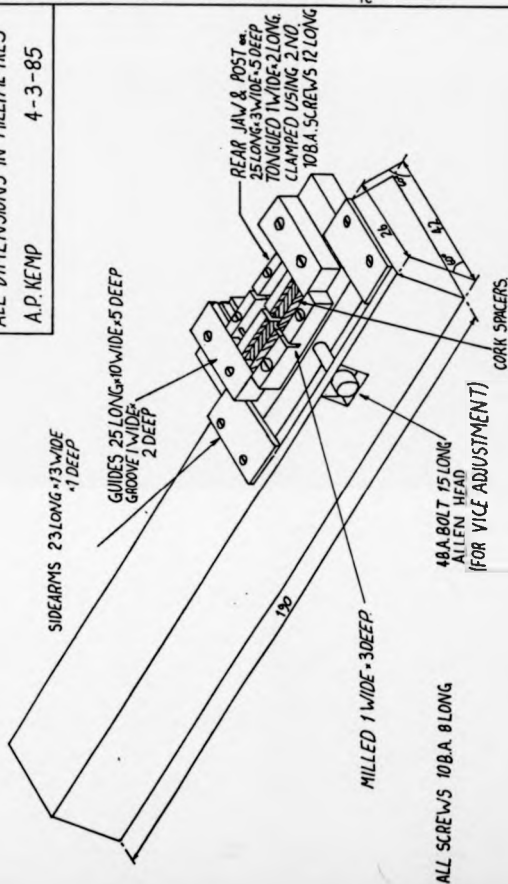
Drawing of 4-point bend jig constructed to perform valid fracture toughness tests.
